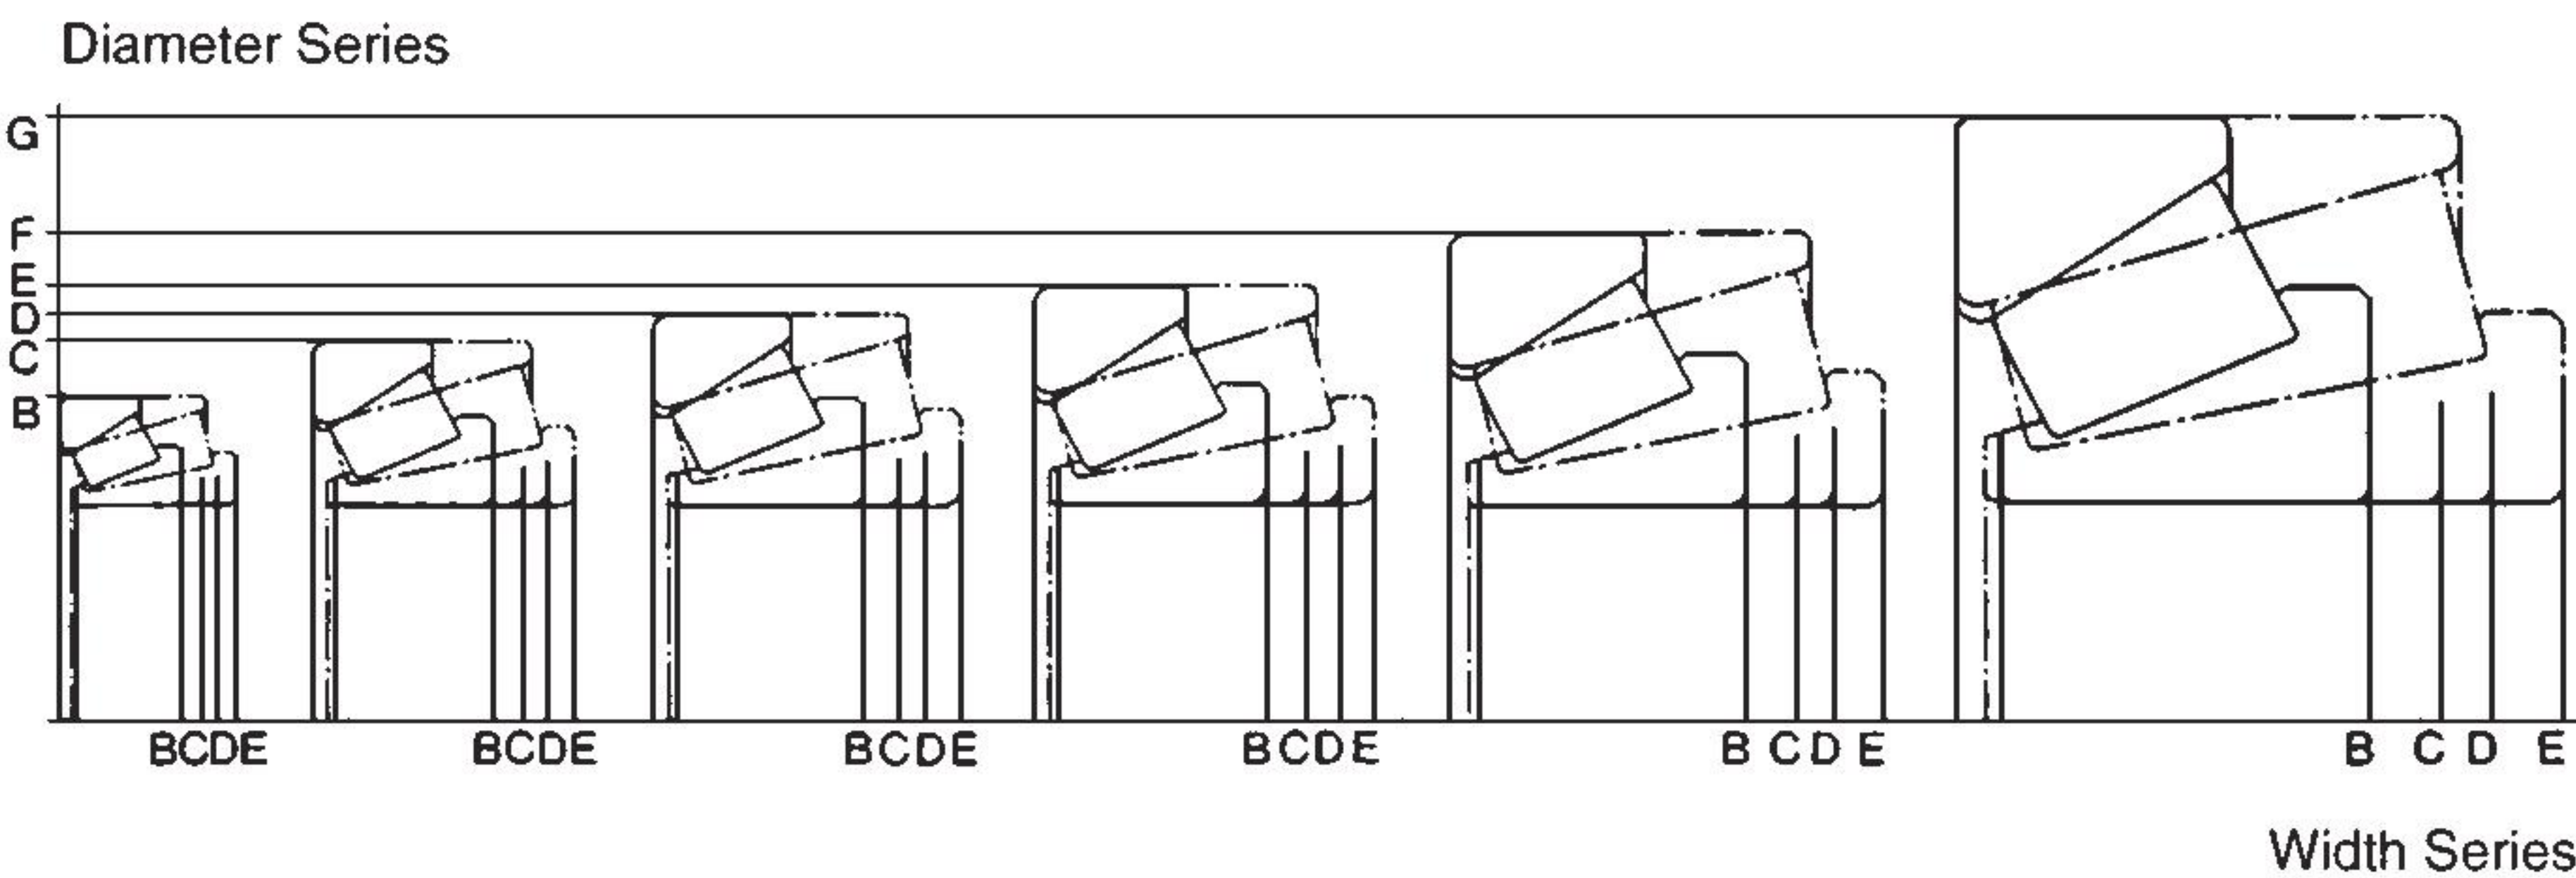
Metric tapered roller-bearing diameter series with common bore size.
